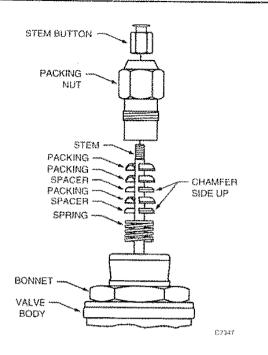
Valve with Chevron Packing and 1/4 Inch Stem.
